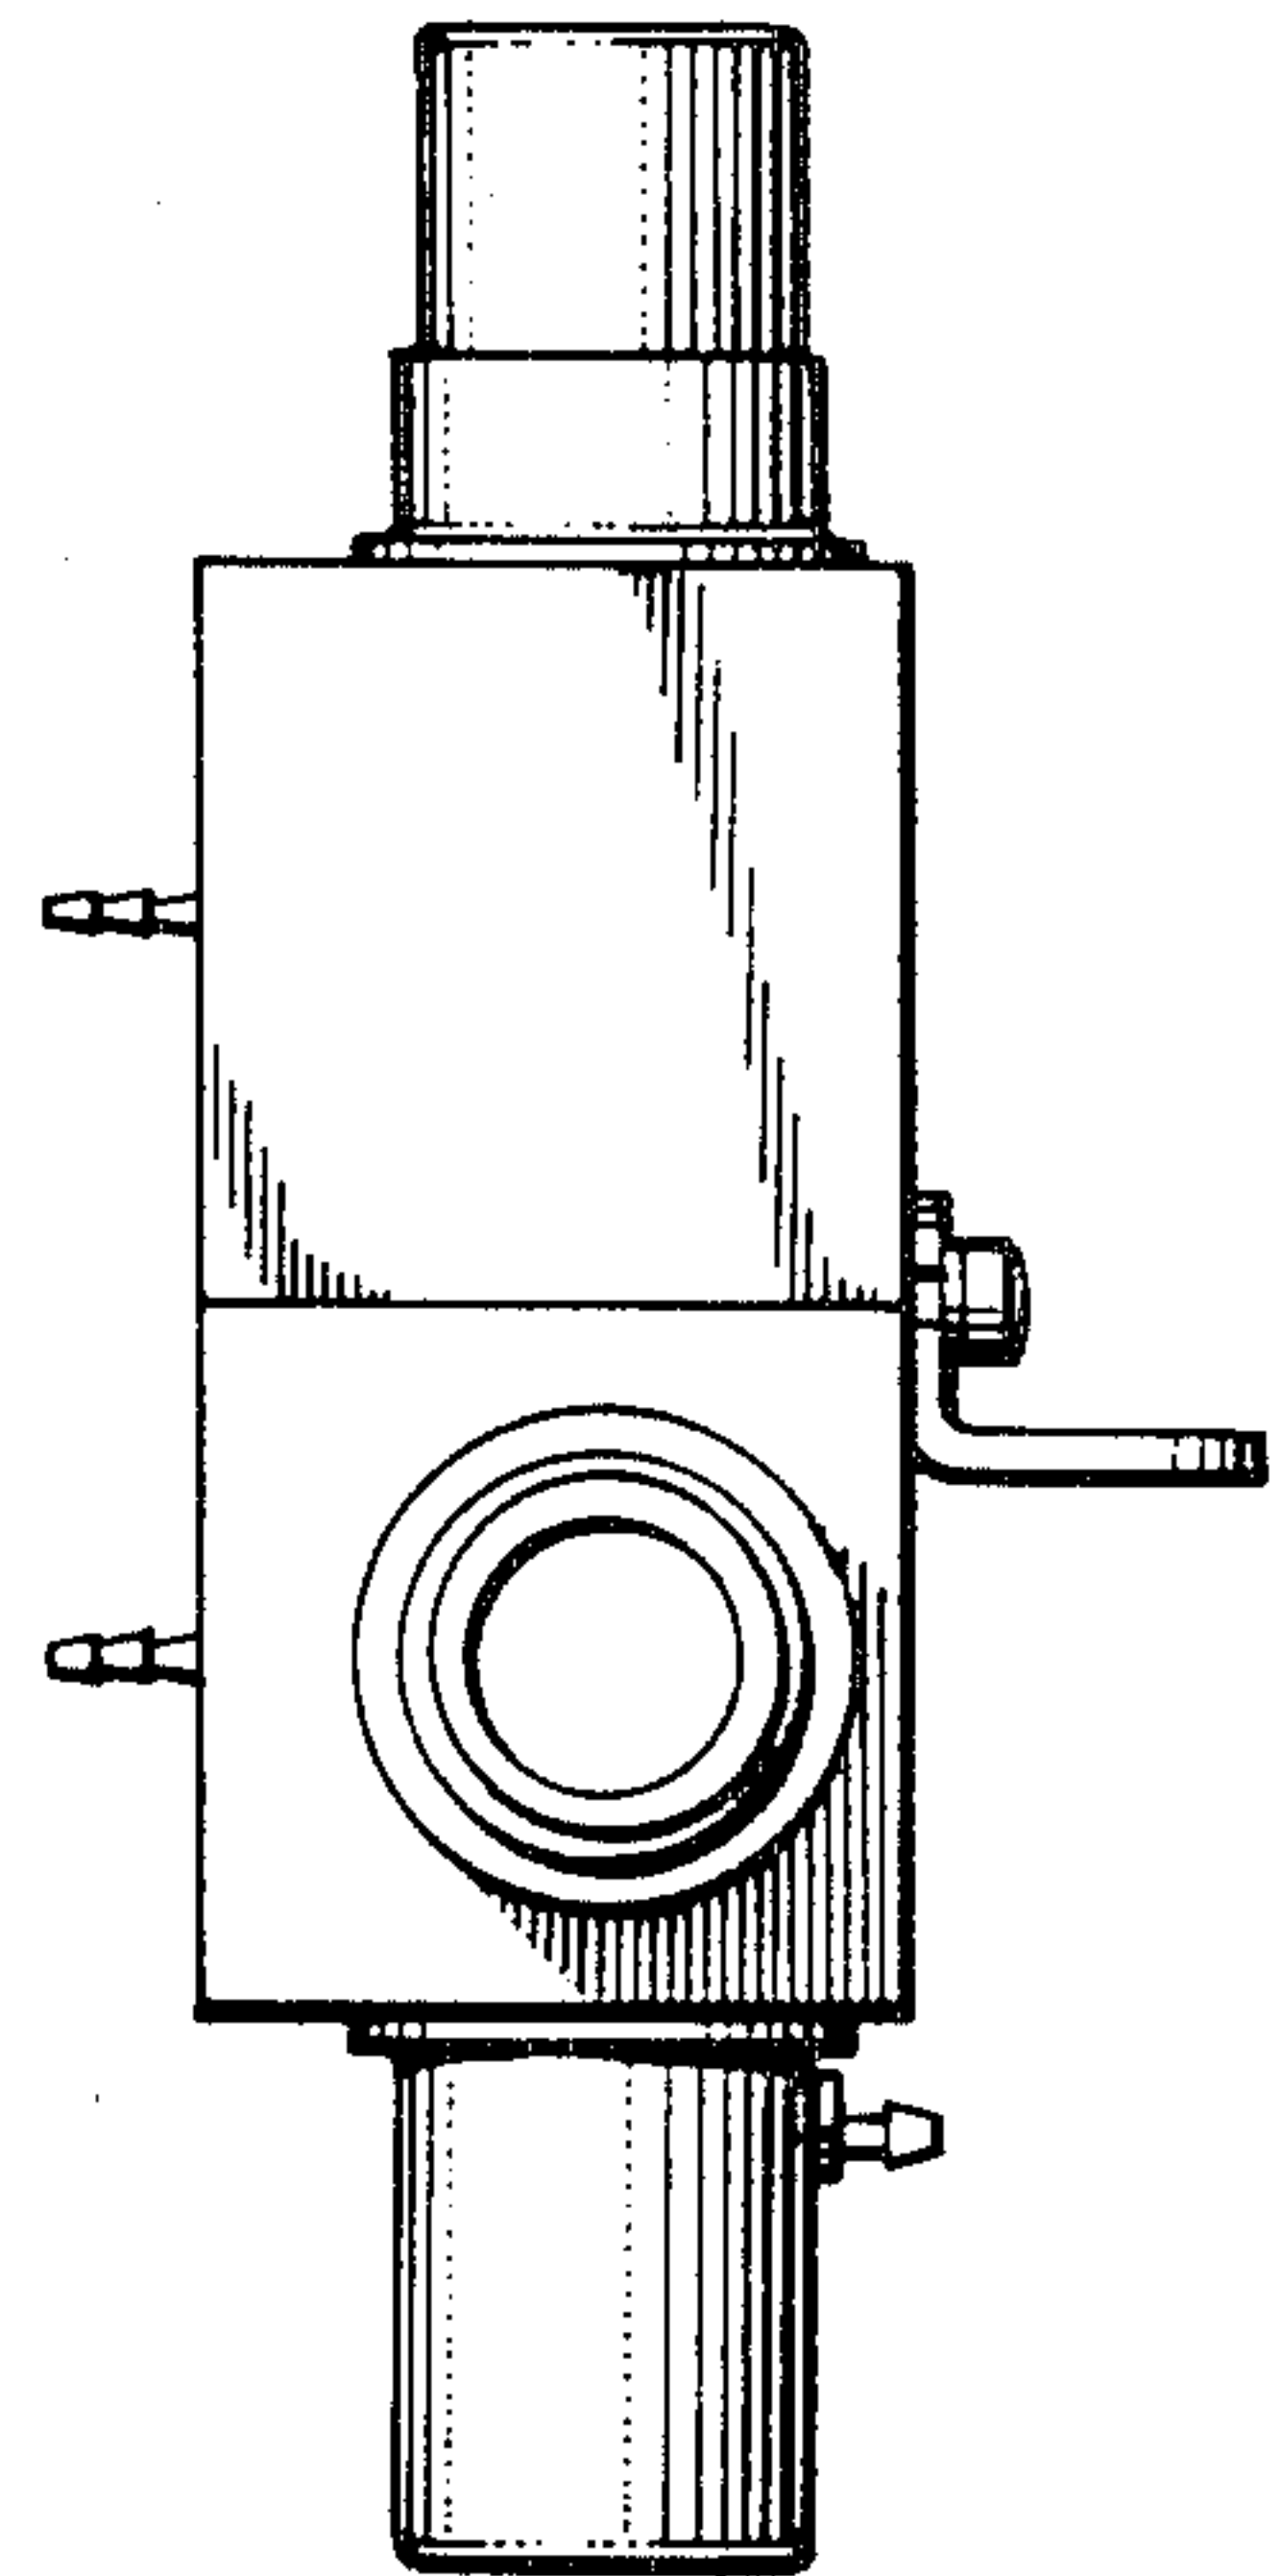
is a perspective view of a four way T-shaped respiratory valve showing our new design;
